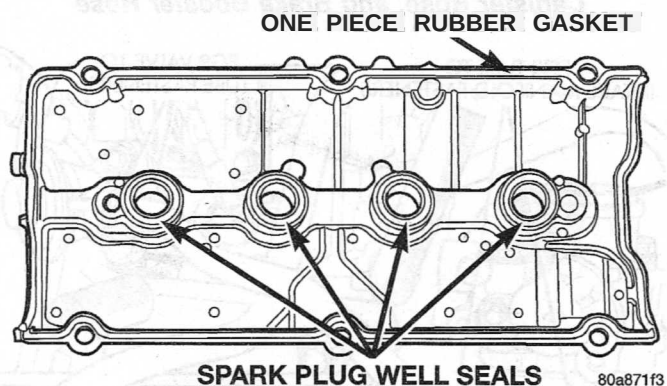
Cylinder Head Cover Gasket and Spark Plug Seals
